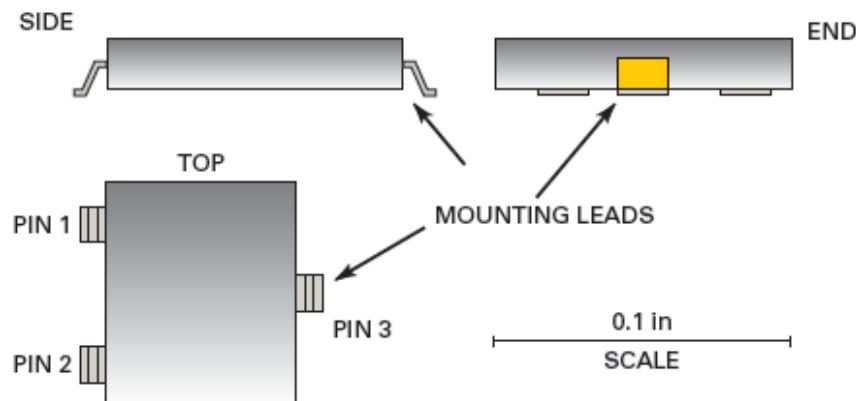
The SOT-23 is a three-terminal transistor package commonly used for SM diodes
